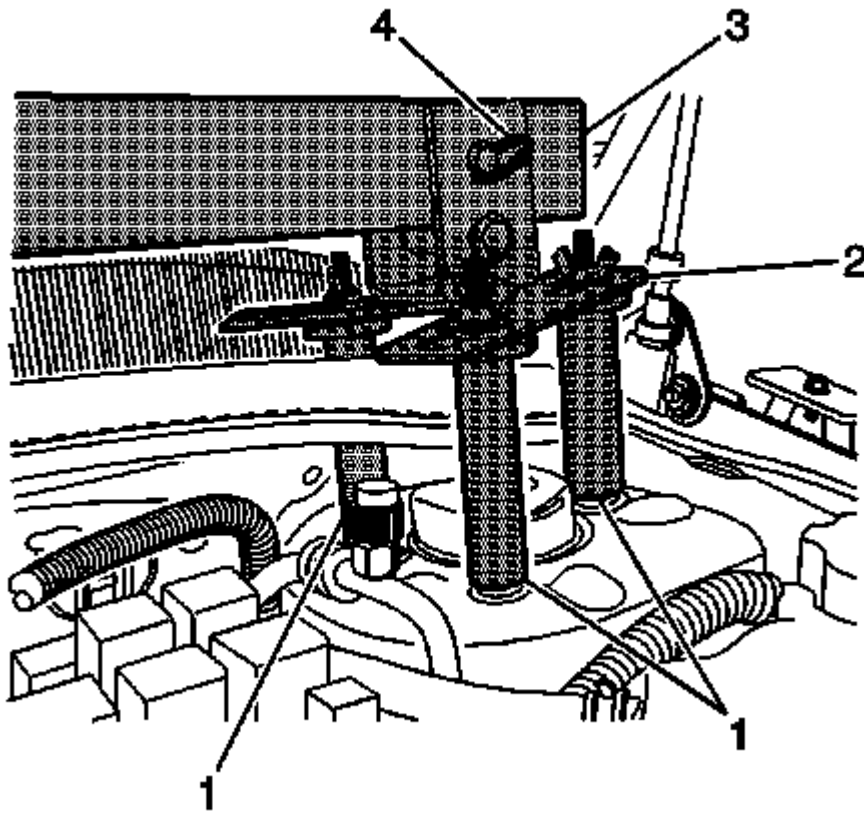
View Of Engine Support Fixture Adapter (J-28467-13)
